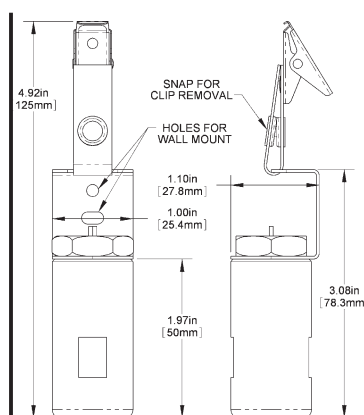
Hanging Bracket, 1" Buffer w/SS Threaded Fitting
